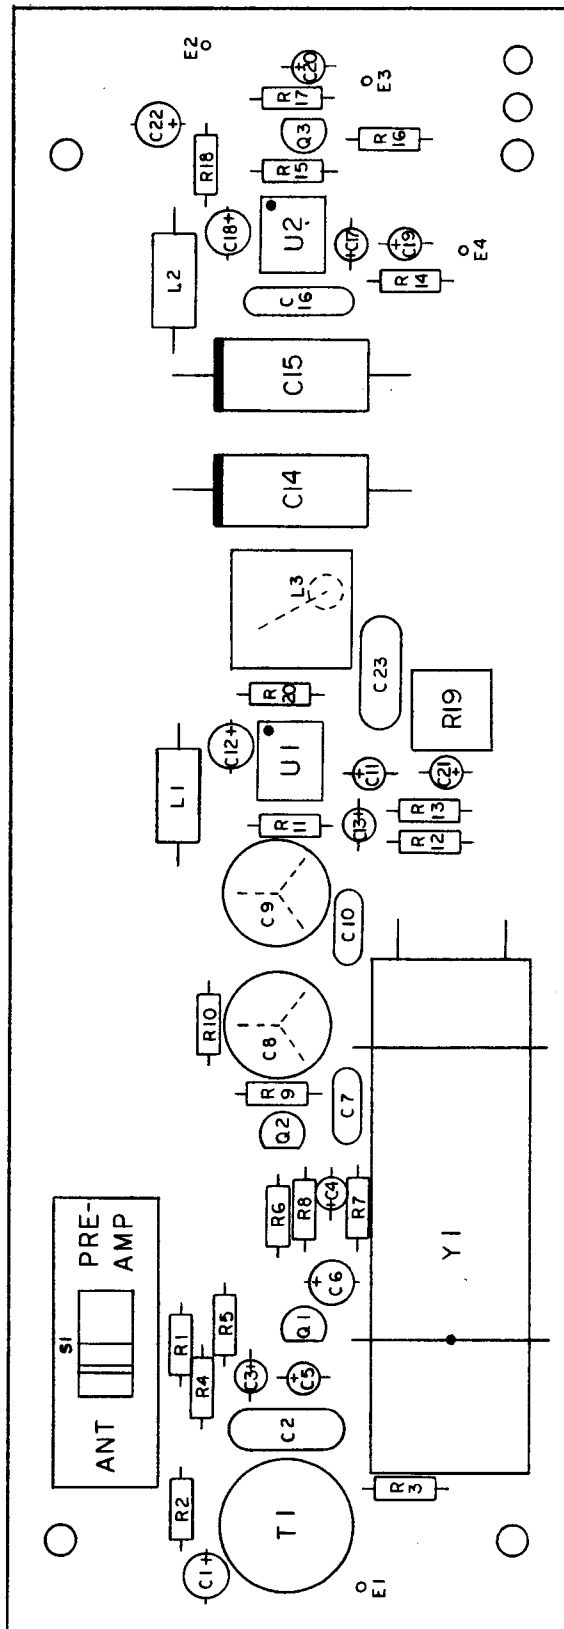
ASSEMBLY DRAWING - A1 RF AMPLIFIER
